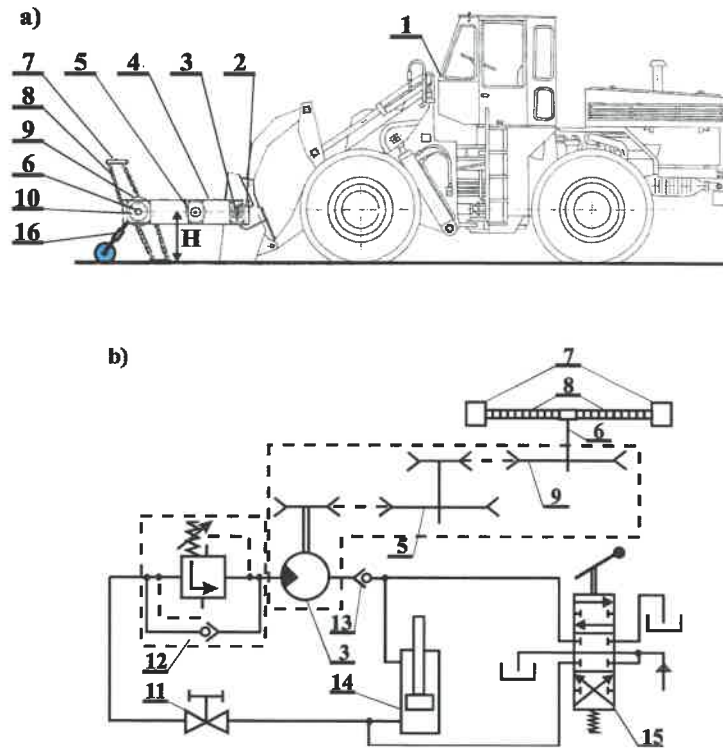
Scrapedozer equipped with an elementary section of mine clearing flail: a - general view, b - diagram of the hydraulic system: 1 - SŁ-34 scrapedozer, 2 - hydraulic lines, 3 - hydraulic motor, 4 - load-bearing structure, 5 - intermediate pulley, 6 - drive shaft, 7 - impactor, 8 - ladder chain, 9 - drive pulley, 10 - shielding cover, 11 - shut-off valve, 12 - flow regulator, 13 - check valve, 14 - DROTT bucket closing actuator, 15 - directional control valve, 16 - jockey wheel [4]
